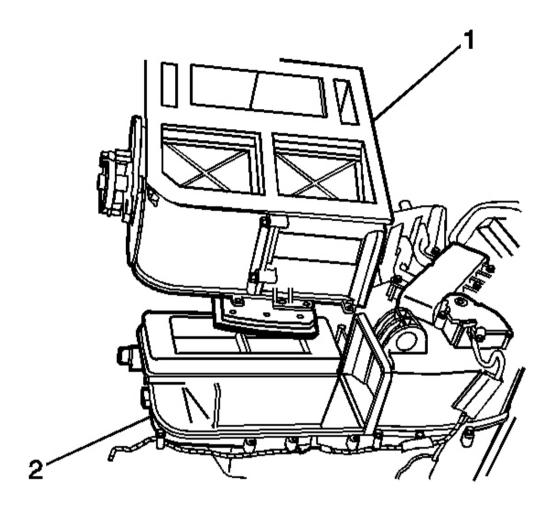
Air Distribution Housing And HVAC Module Assembly Courtesy of GENERAL MOTORS CORP.
